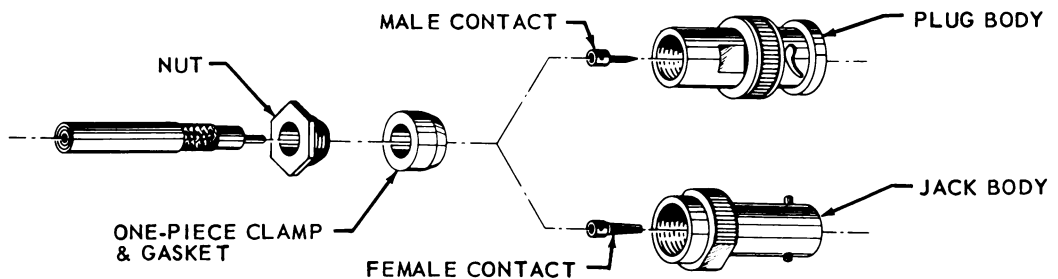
Modified Standard BNC Connectors - Exploded View
